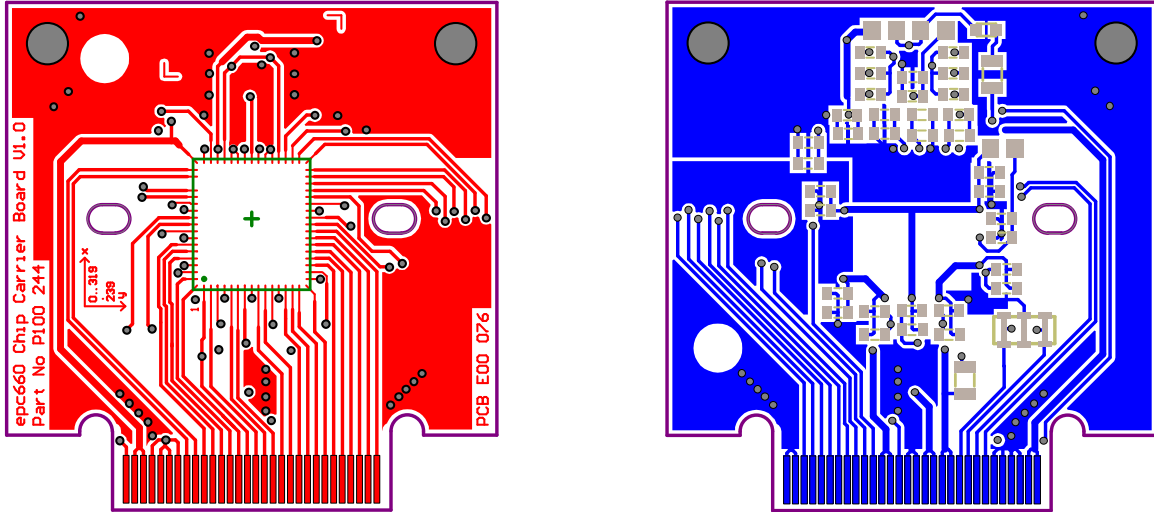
epc660 CC Chip Carrier: Layout top and bottom
